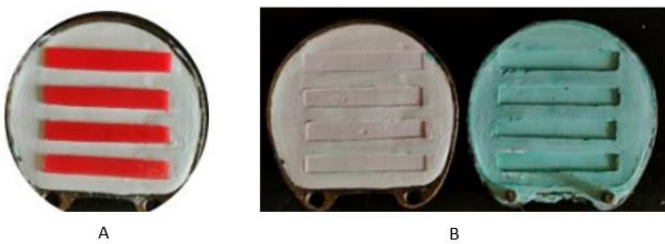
(A) Wax Patterns were flasks and (B) mold space after dewaxing.
